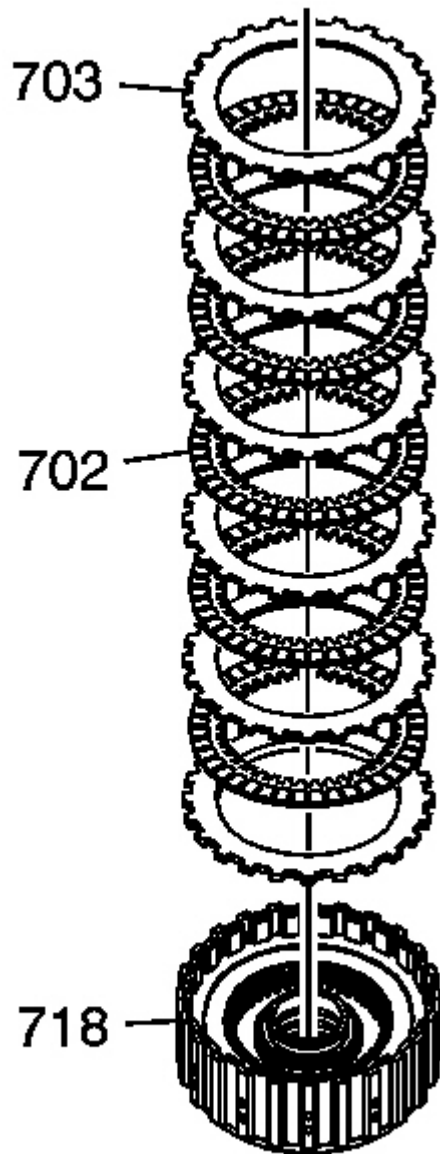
1st Clutch Steel Plate, 1st Clutch Fiber Plates & 1st Clutch Housing
